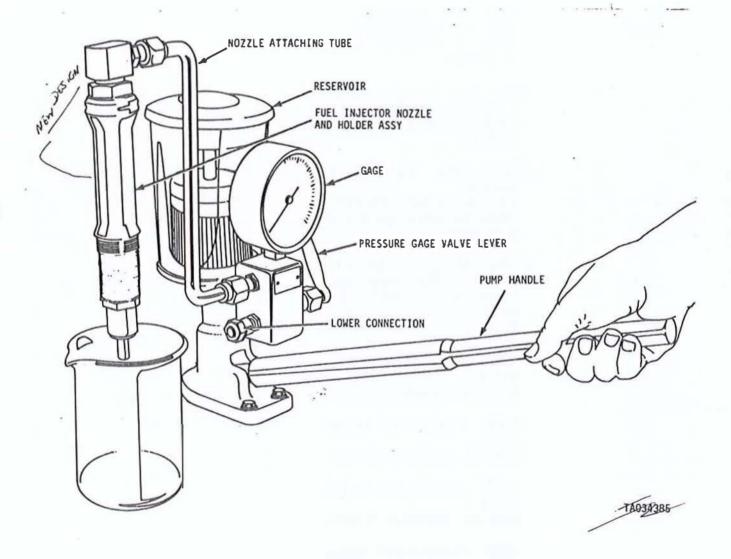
Testing fuel injector nozzle and holder assembly.
